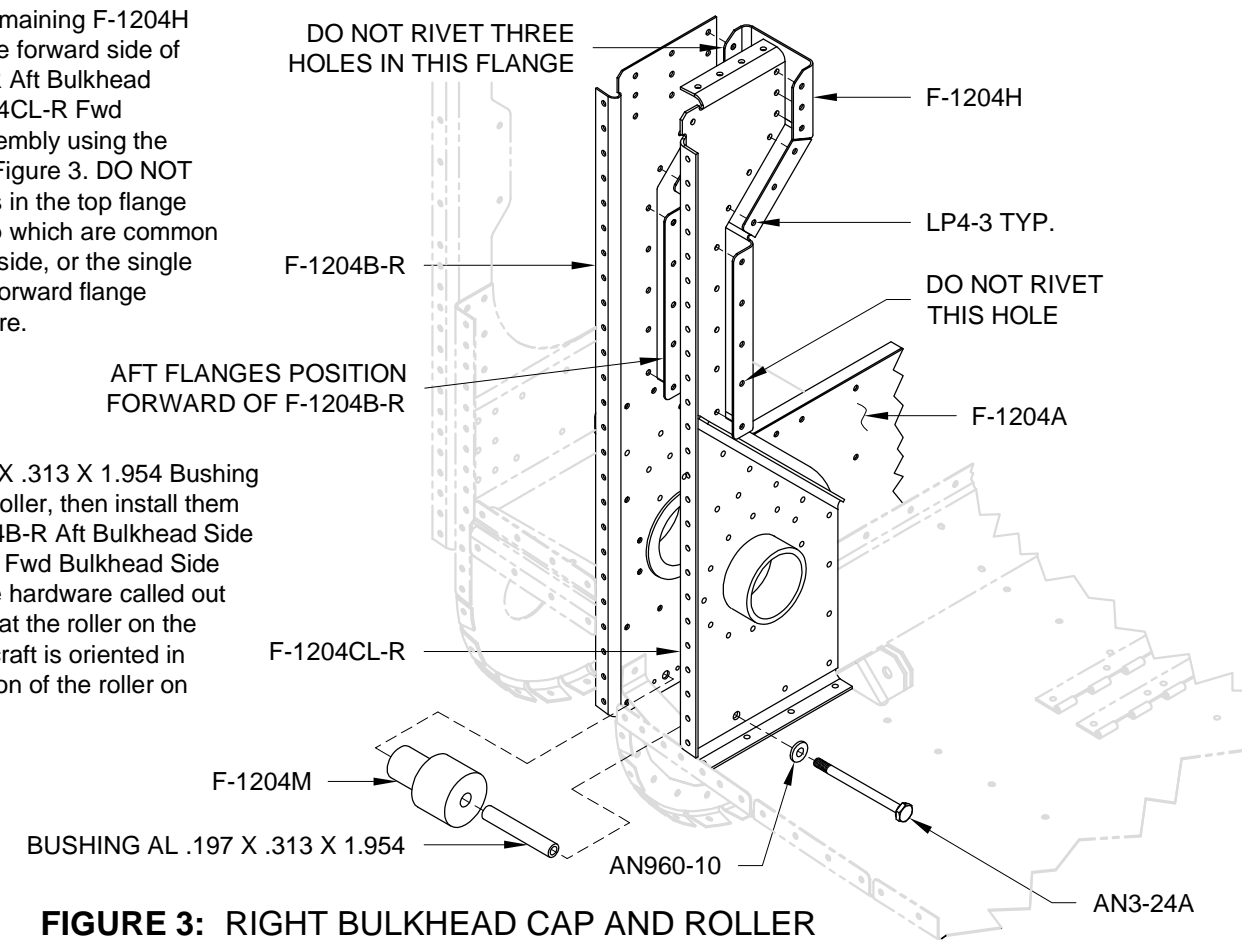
RIGHT BULKHEAD CAP AND ROLLER
